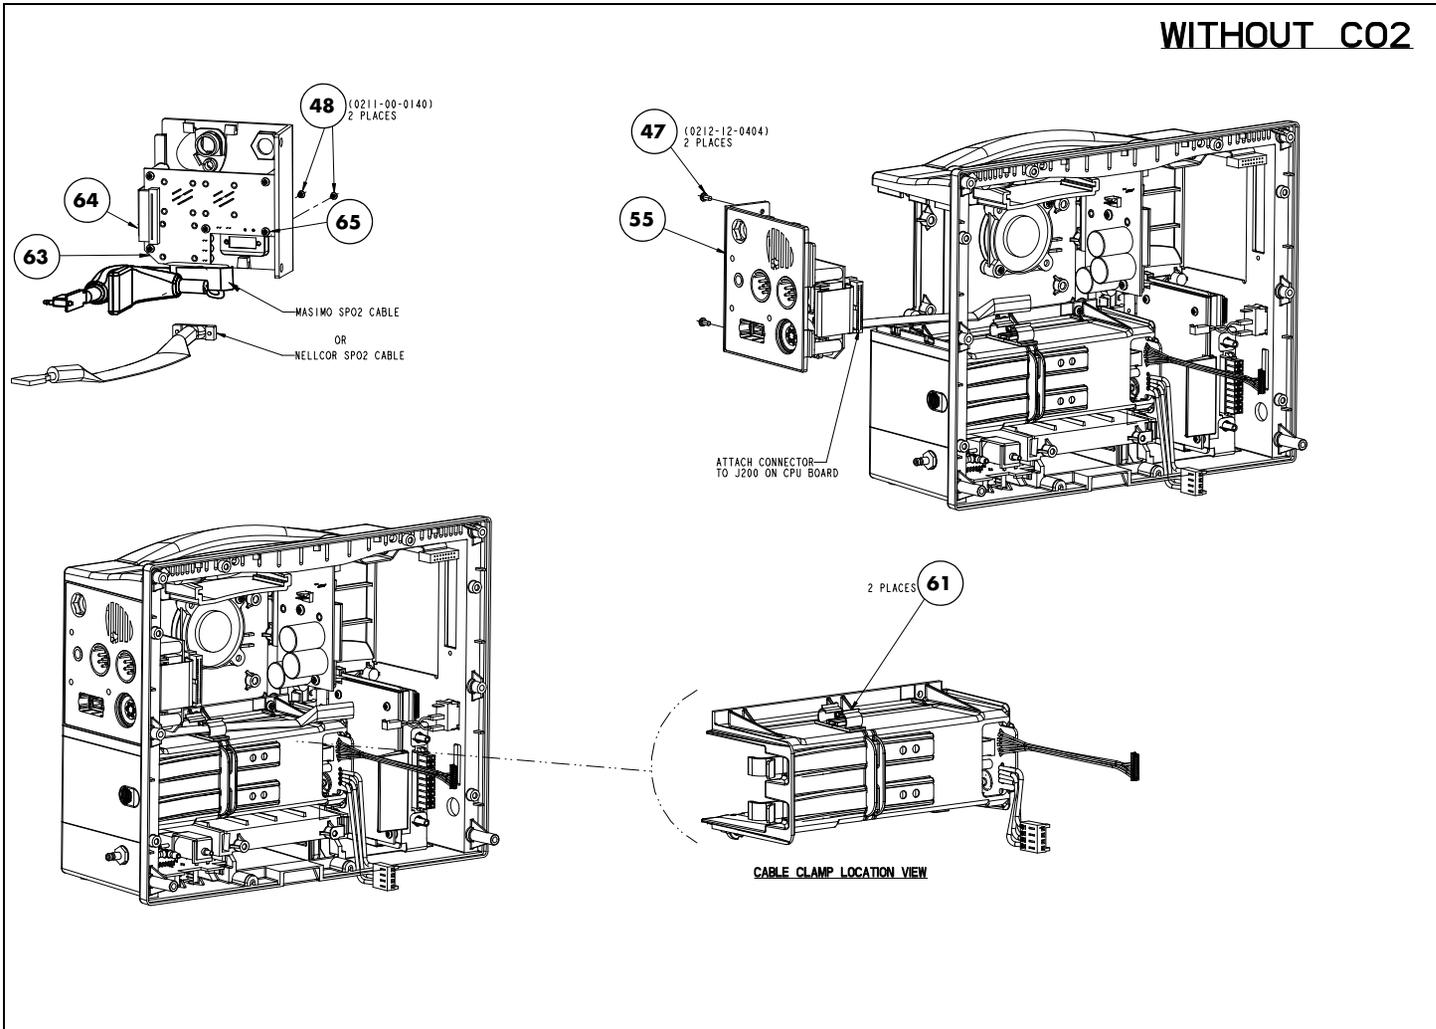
Rear Housing Assembly (Lithium-Ion battery configuration)
